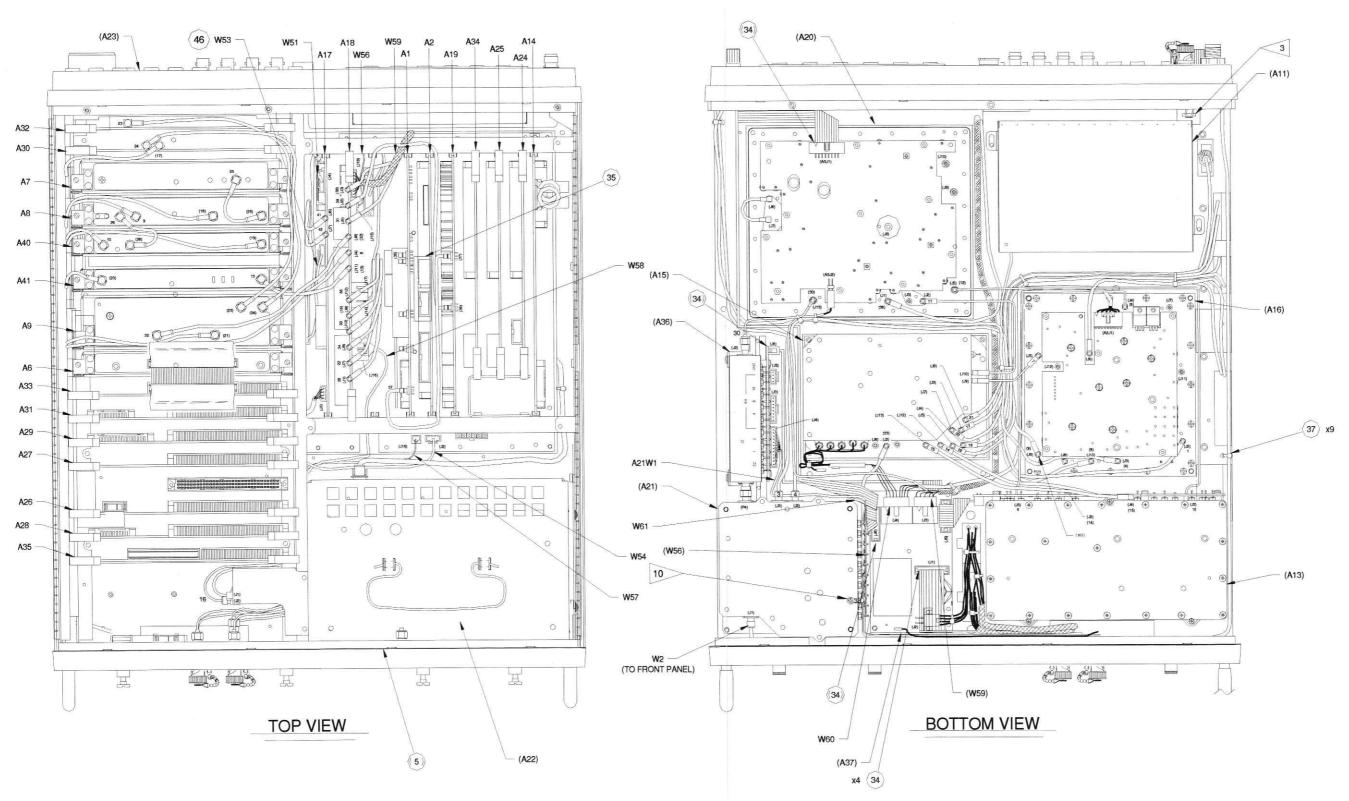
Test Set (34A5) Assembly, Cable Locator and Interconnect Diagram (Sheet 4 of 7)
